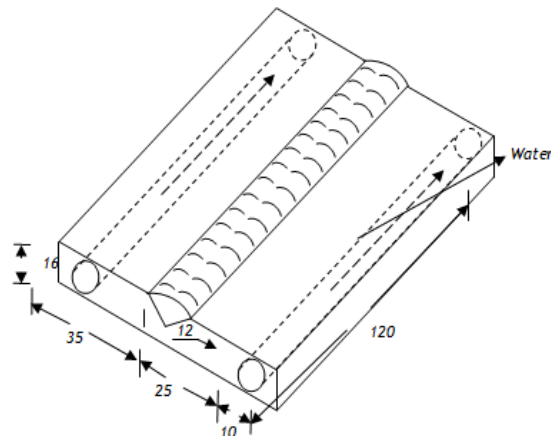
Butt welded specimen (all dimensions in mm)
